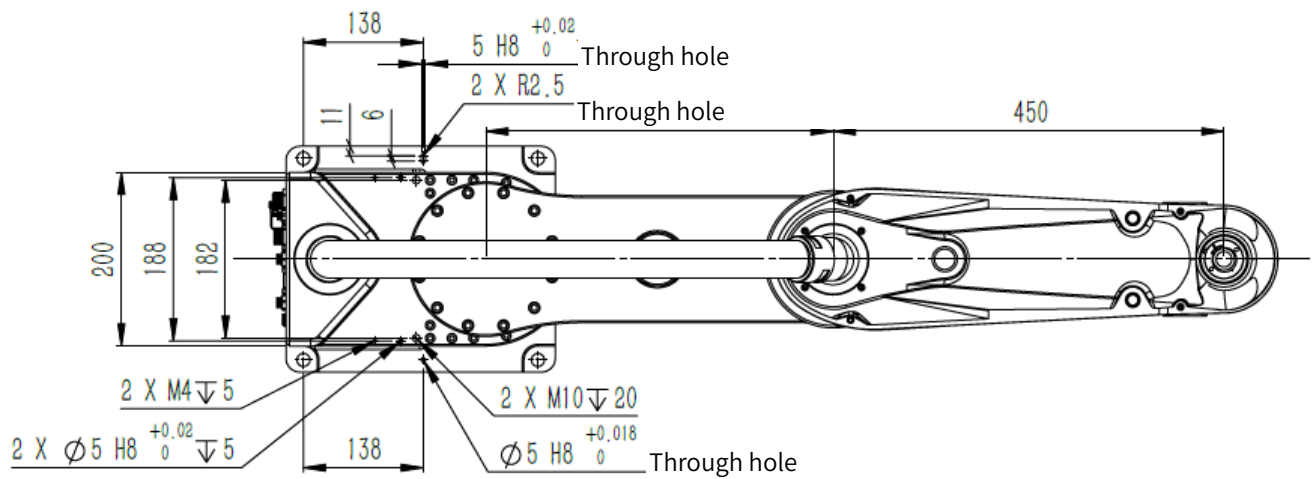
AH20-0850-0204-2000 dimensions (unit: mm)
